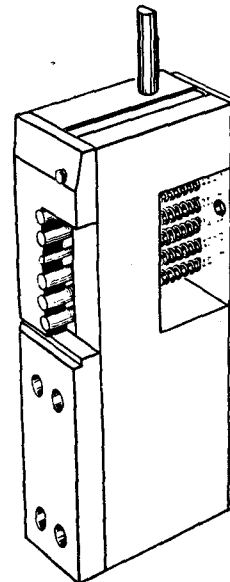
DIE PLATE OF PRINTING REPERFORATOR, No. 1.
